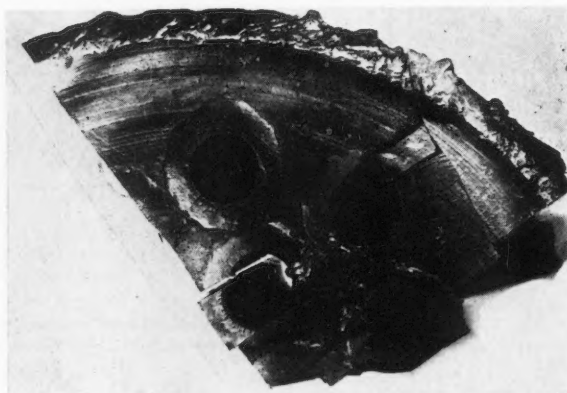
Case 2. Section from the top tube sheet of the AISI 347 waste heat boiler showing the thermal-corrosion cracks in the ends of the tubes.
